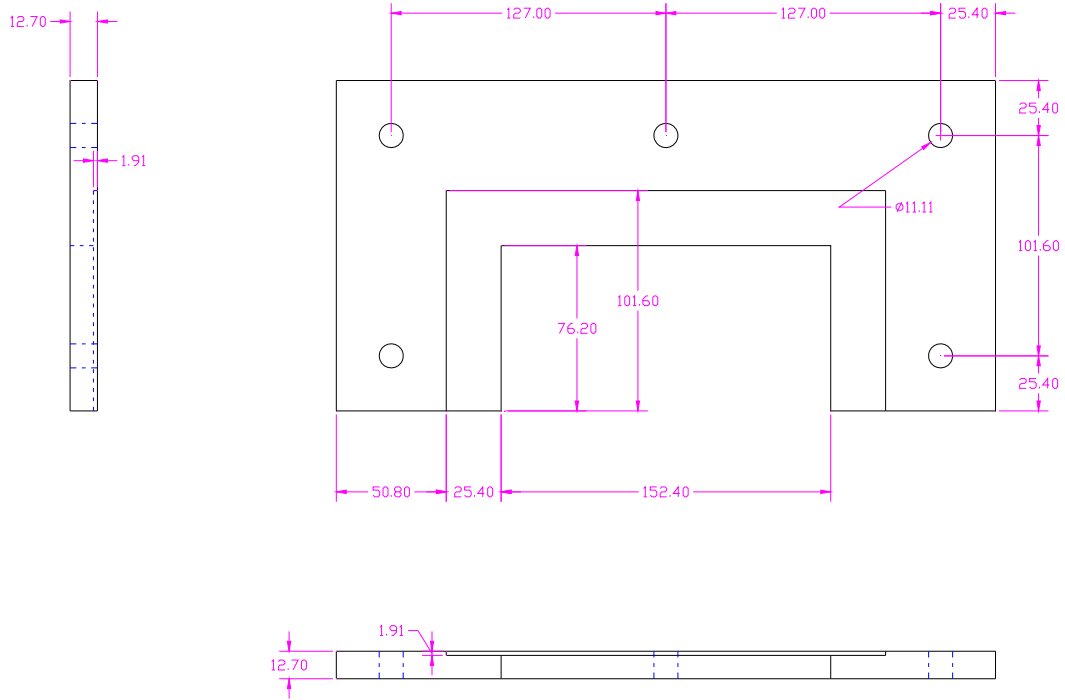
Design drawing for part #3, a total of eight pieces (all values are in mm)
